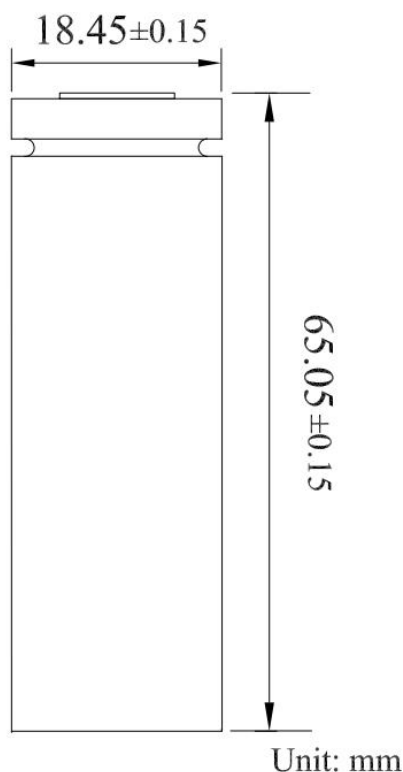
Outline Dimensions of CMINRF9E(with tube)
